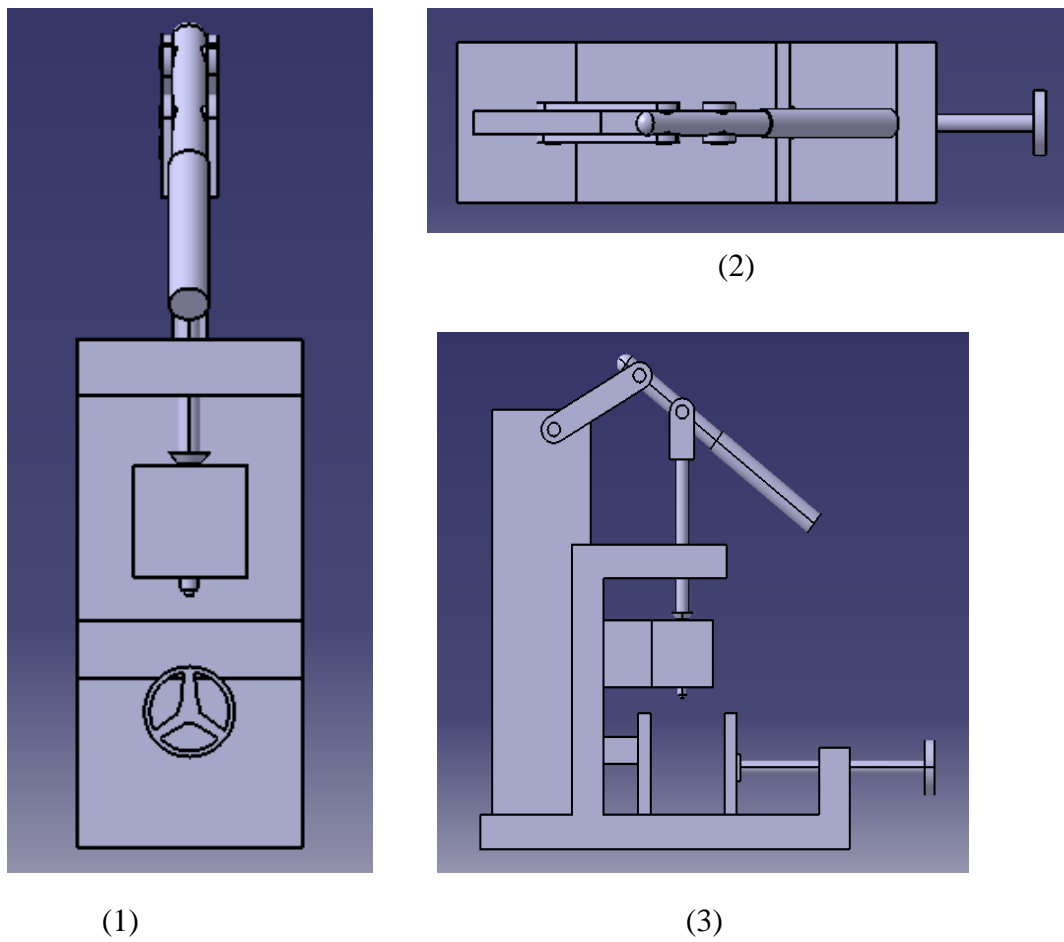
1) front view, 2) top view and 3) side view of design 1
